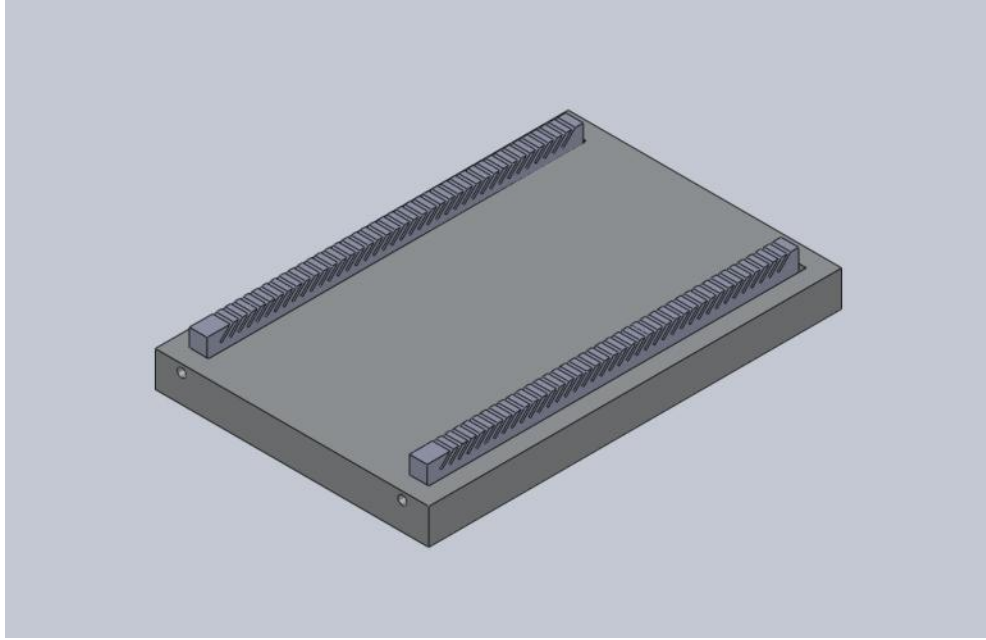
Assembly mount. The geometry of the mount dictates the area fraction of assembly sites within the assembly environment.
